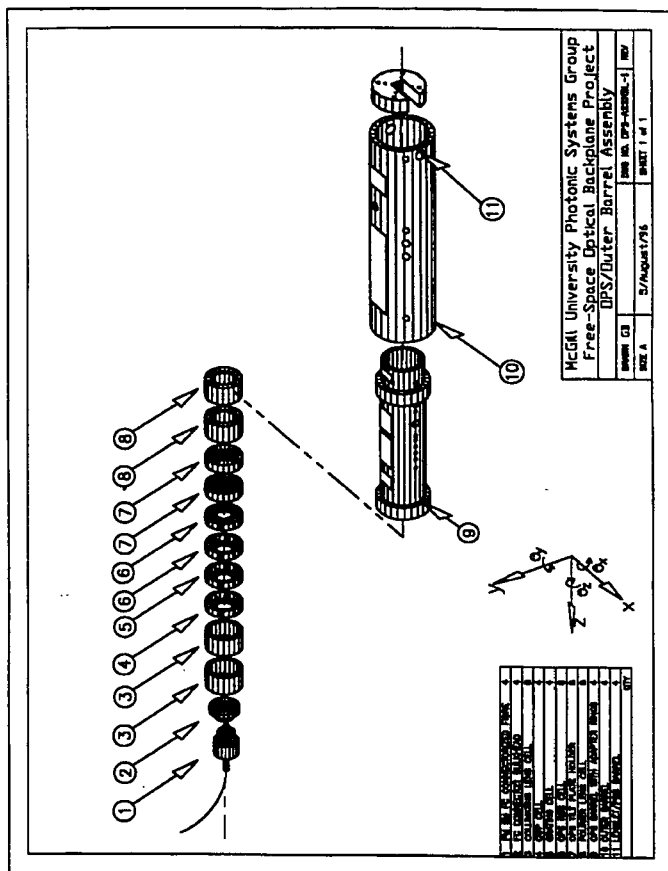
Mechanical Drawing of the OPS, the Lenslet Barrel, and the Outer Barrel
